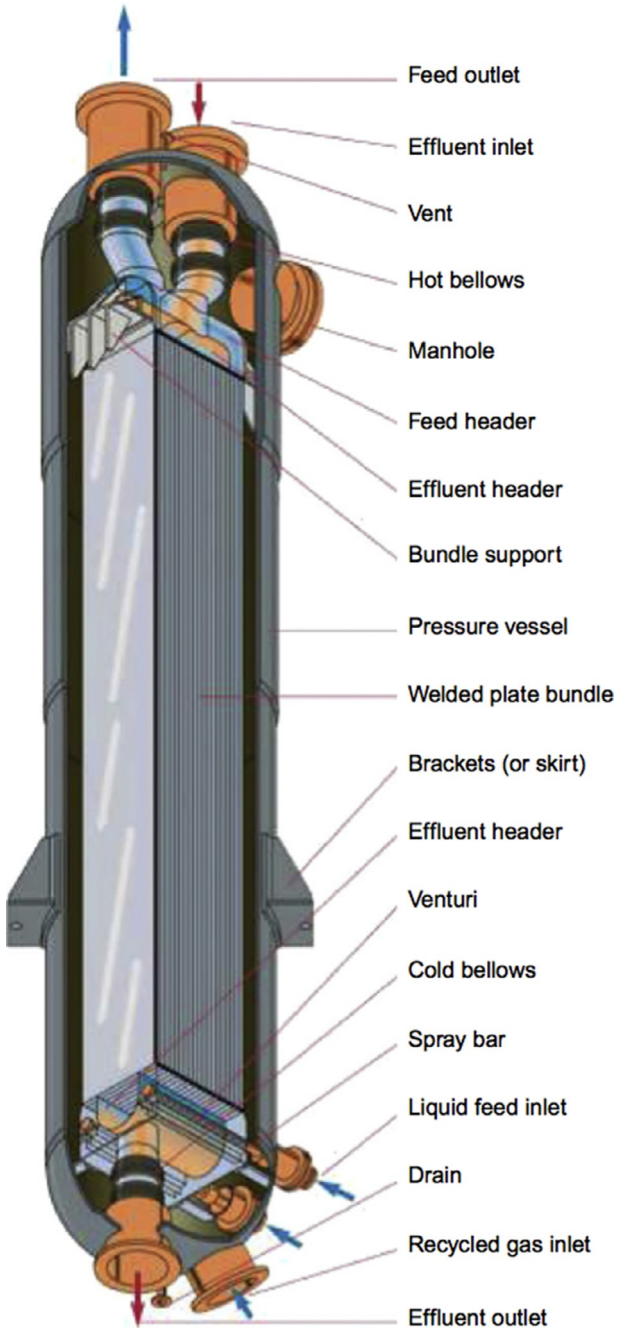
Welded plate-and-frame exchanger (Alfa Laval/Packinox).
